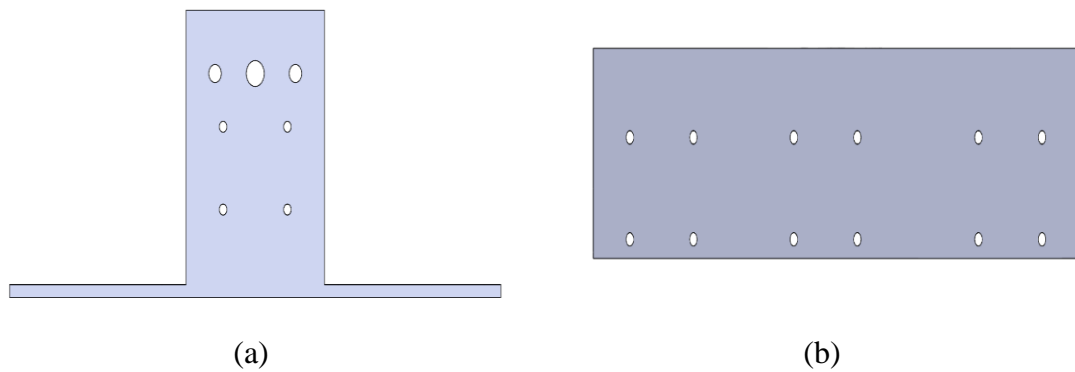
X-axis Supporter (a) Top View and (b) Front View
